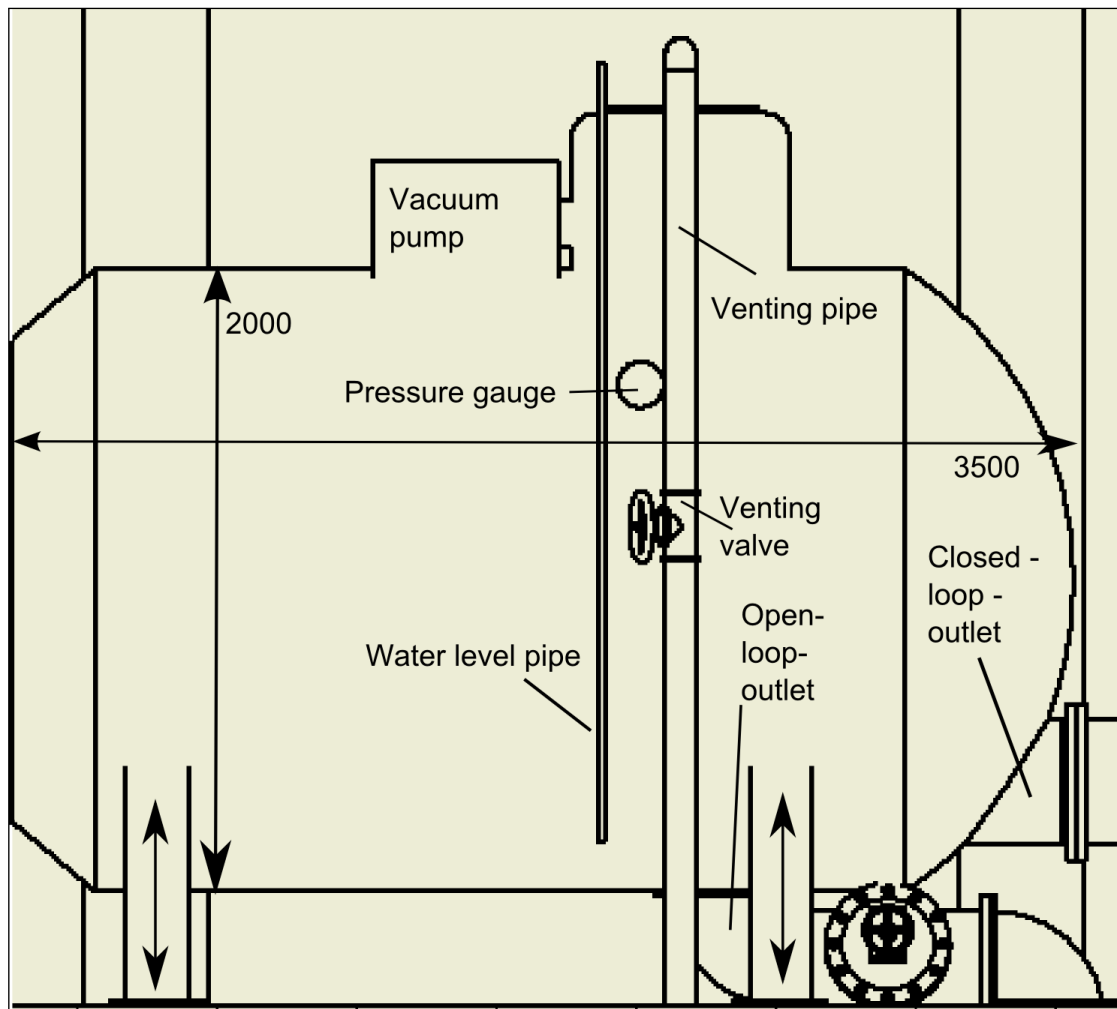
Drawing of the suggested draft tube tank for TTL. All dimensions are in mm.
